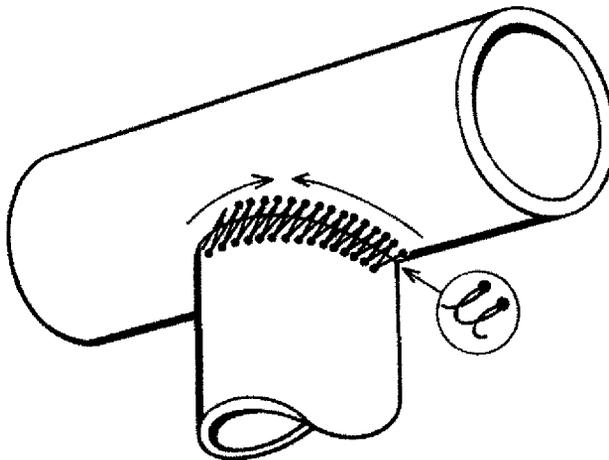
Weave pattern for welding T-joint with intersecting pipe below horizontal pipe.
